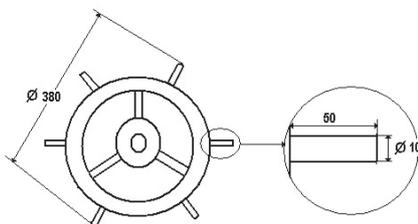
Dimensions of the spike-tooth beater (all measurements are mm)
